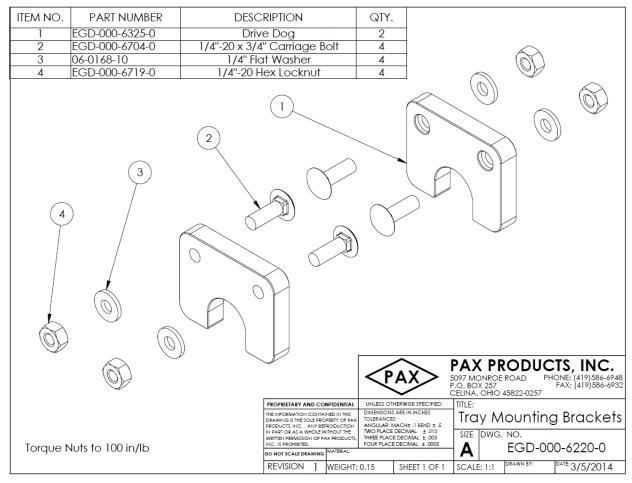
EGD-000-6220-0 TRAY MOUNTING BRACKETS
